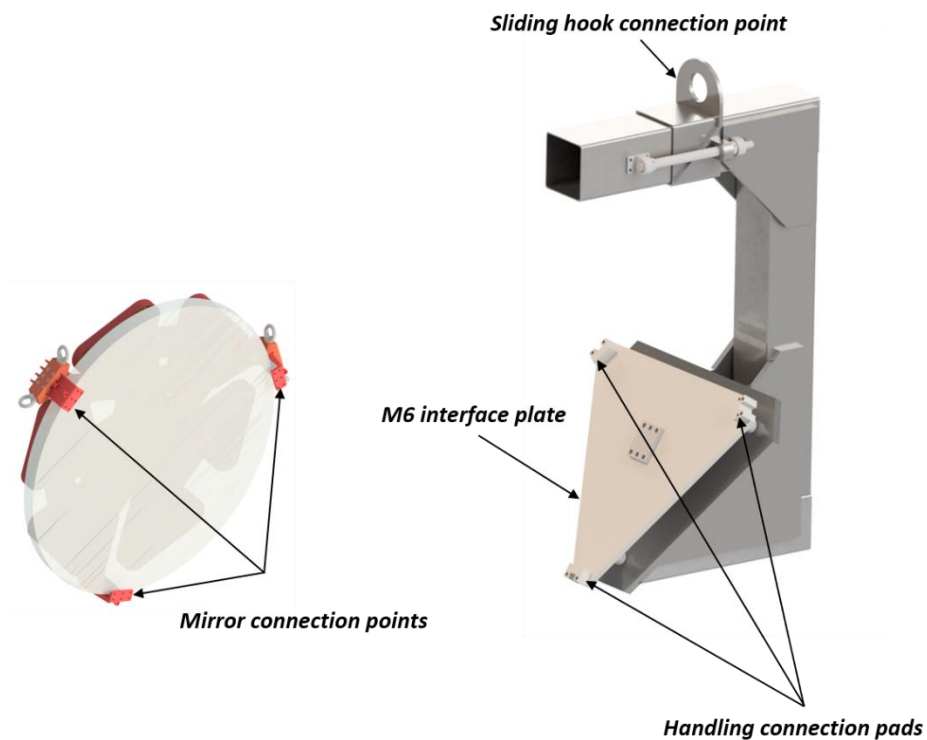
C-shaped handling for M6 installation. The interface between M6 and the handling is between the 3 branches embracing M6 and the 3 connection pads of the handling. The handling is equipped with a hook hoisting connection point having the possibility to slide, in order to have it aligned with the barycentre of the system both when M6 is connected and disconnected.
